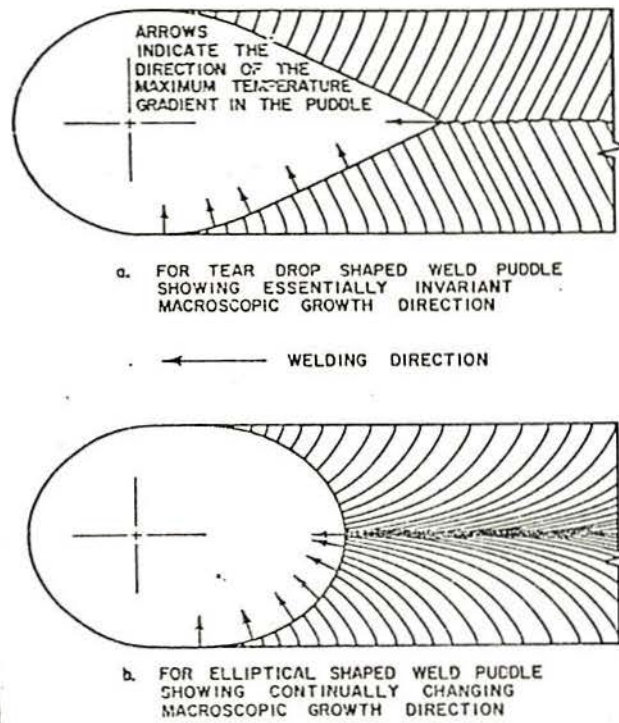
Schematic Representation of Two Weld Pools, showing their Shapes at (a) High , and (b) Low Welding Speed. / 56 /.
